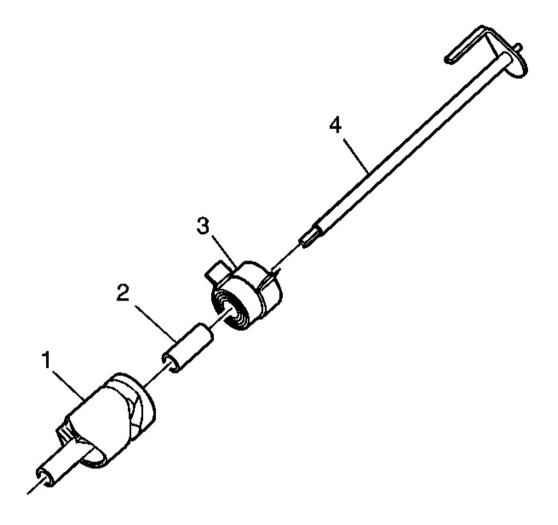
Shift Detent Lever Assembly Components Courtesy of GENERAL MOTORS CORP.
